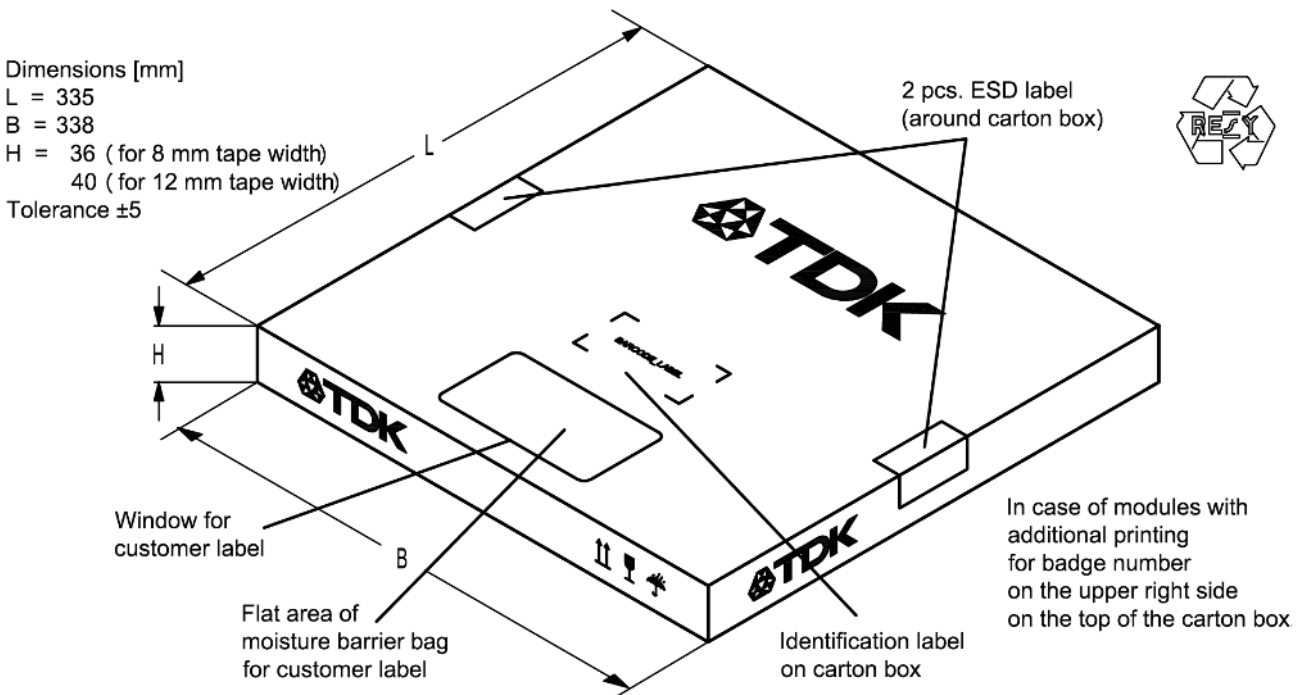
Drawing of folding box for reel with diameter of 330 mm.
